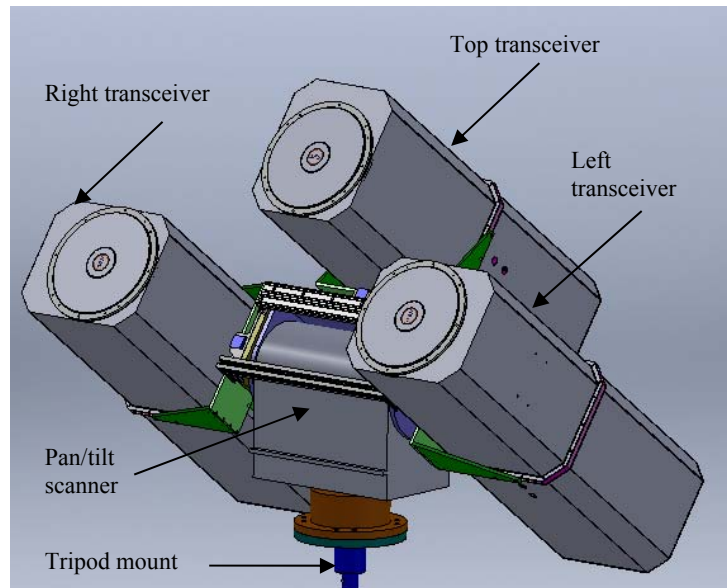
Design of the ABC lidar transceiver assembly showing the arrangement of three 8-inch aperture lidar transceivers on a common frame mounted on a pan-tilt scanner.
